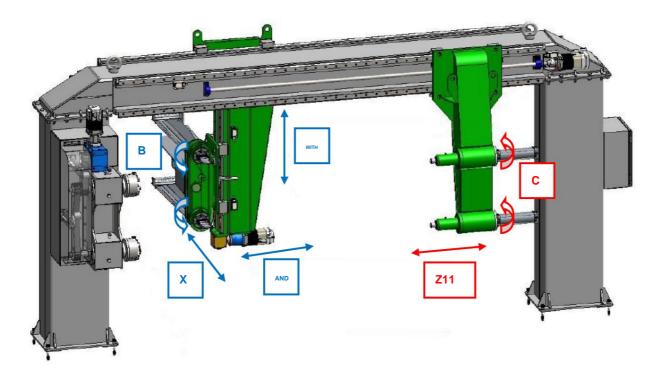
Machine for Filament Winding, front view, indication of the 6 axes (C axis, Z11 axis for the tailstock, B axis, X axis, Y axis, Z axis for the fiber holder tool)
